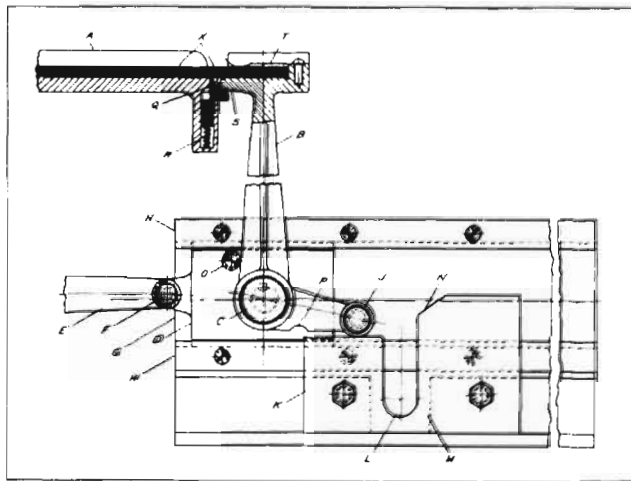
When bellcrank *B* starts its swing, roller *J* rides over the lower horizontal surface of guide plate *K*.
